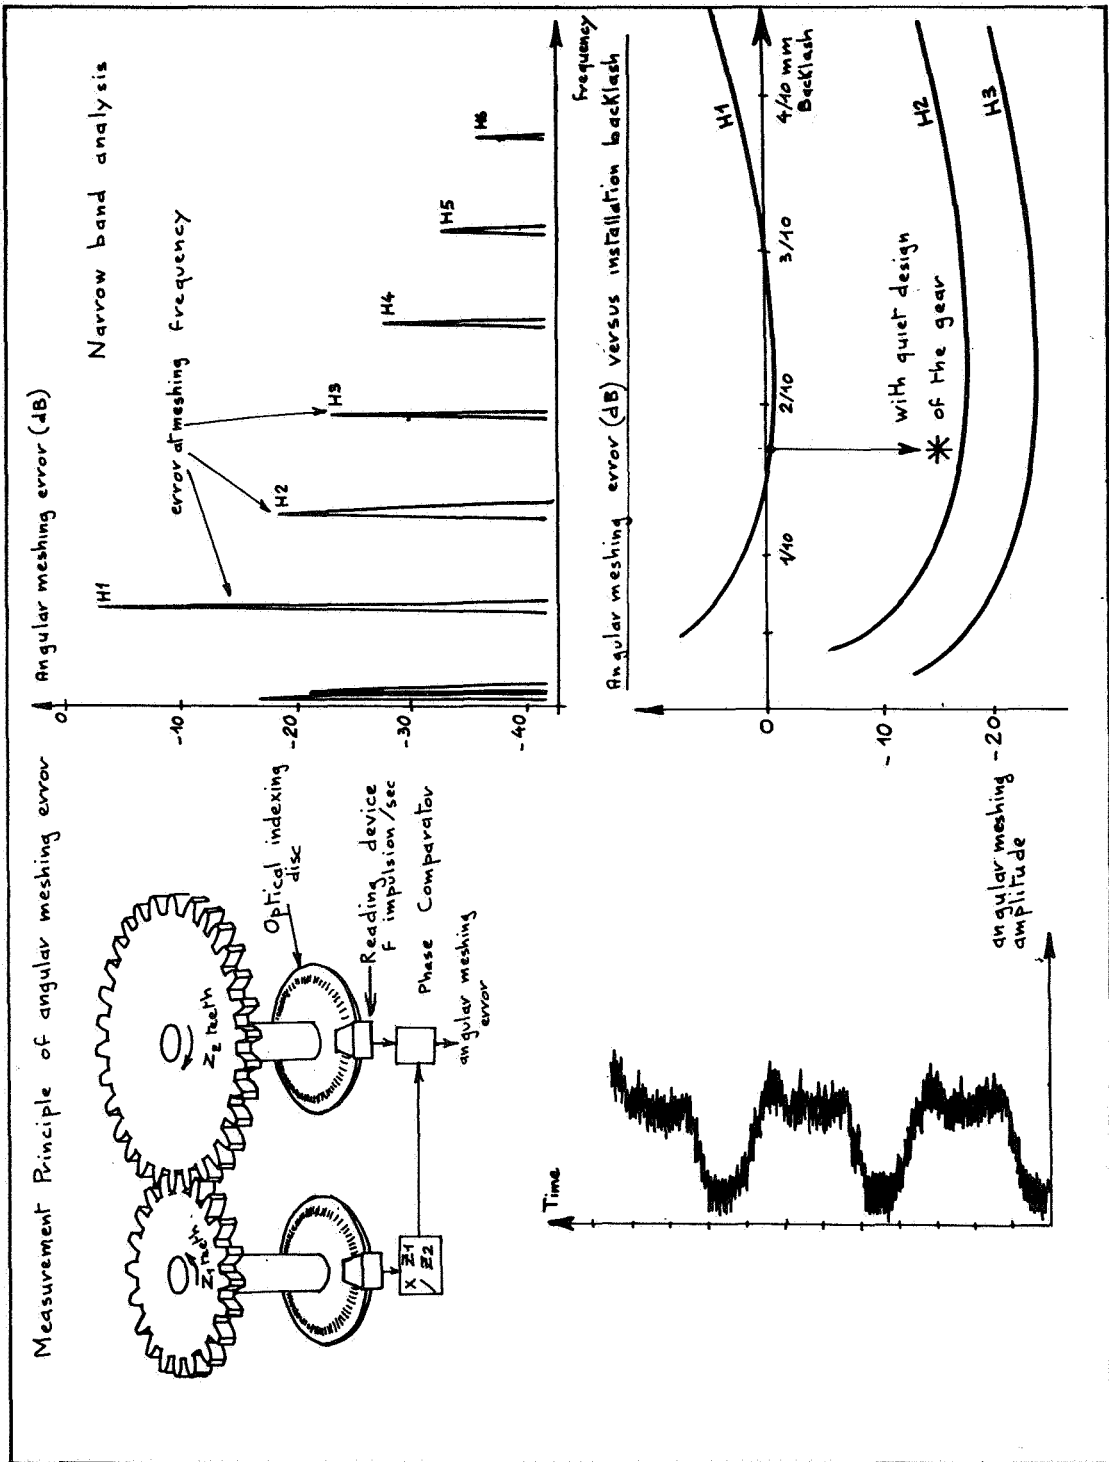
Angular meshing error measurements on a pair of pinion gears.
